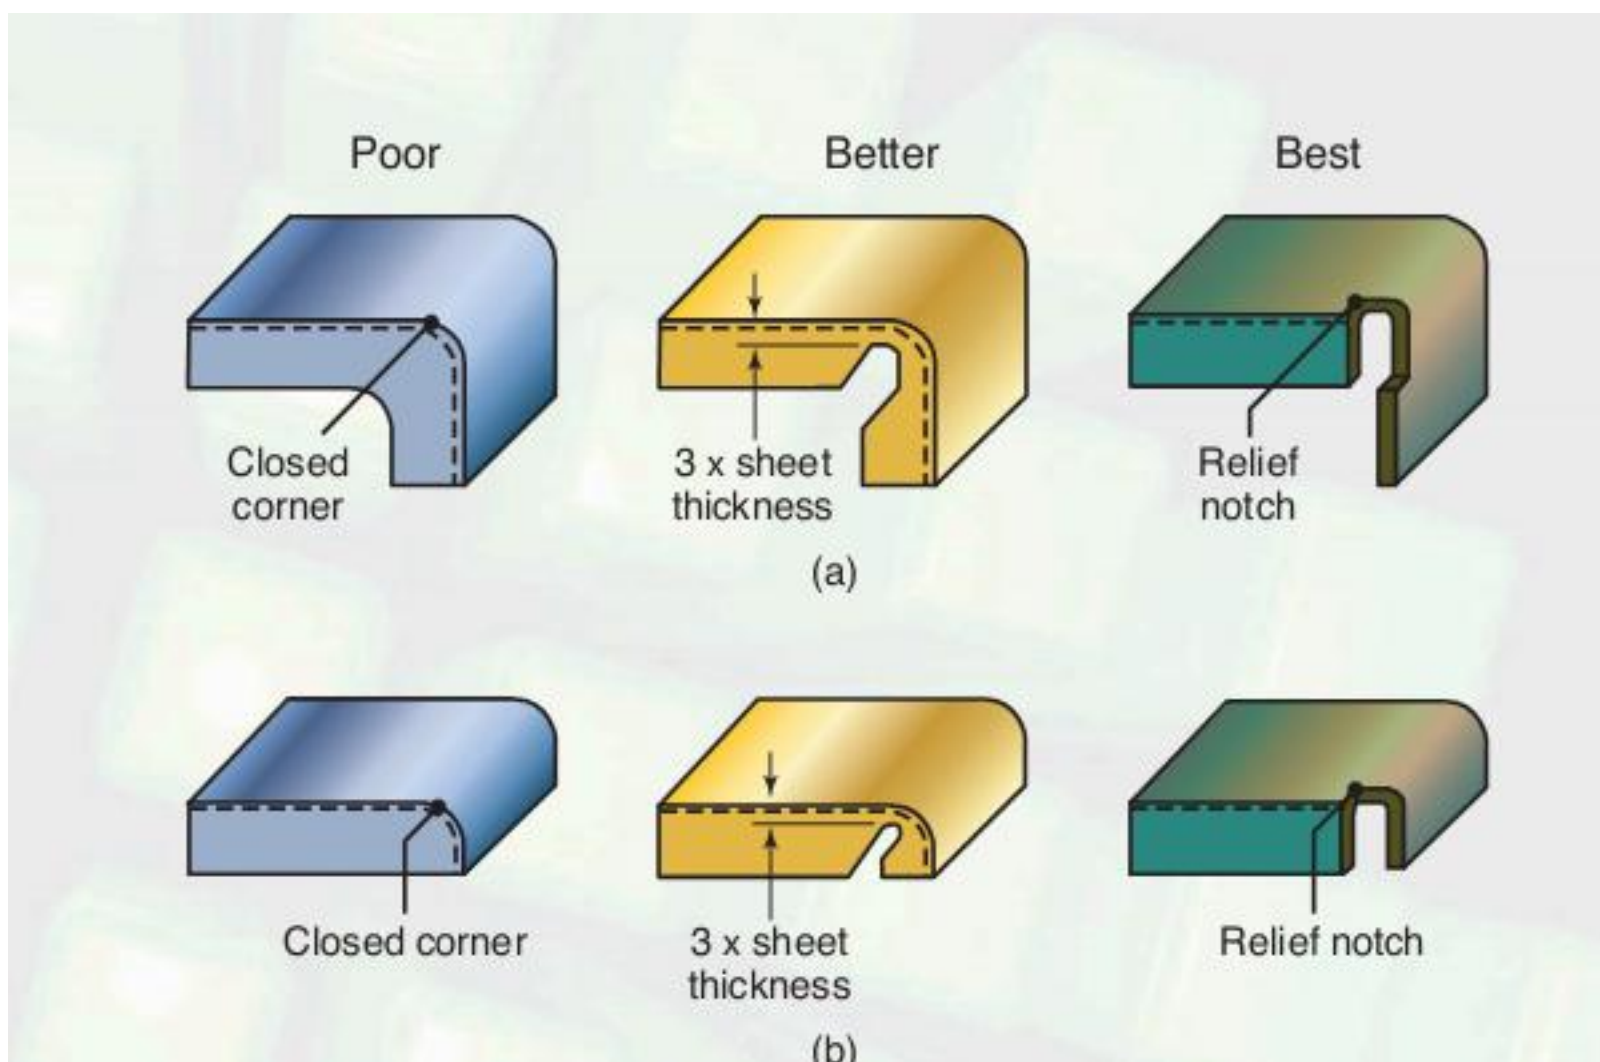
Control of tearing and buckling of a flange in a right-angle bend. Source: Society of Manufacturing Engineers.
